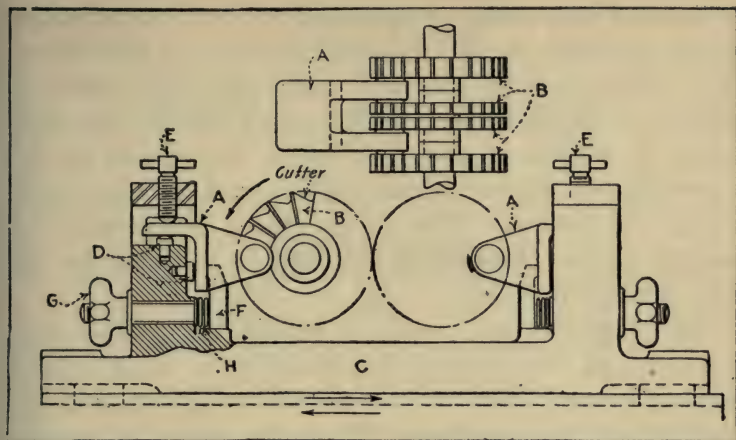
SIMPLE TYPE OF CONTINUOUS MILLING FIXTURE
